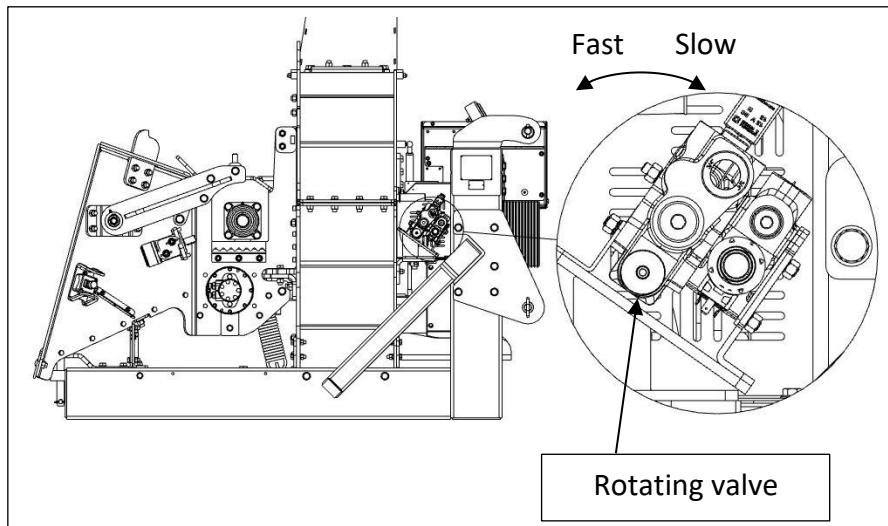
Setting the infeed speed for PC-3300-PIC and PC-3300-SIC
